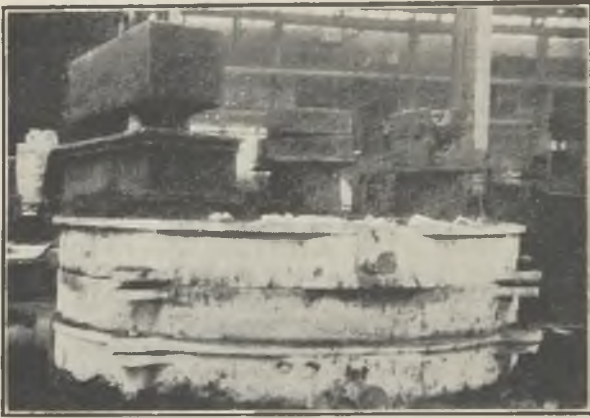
PLYWHEEL MOULD ARRANGED FOR STEAM-PRESSURE FEEDING.
